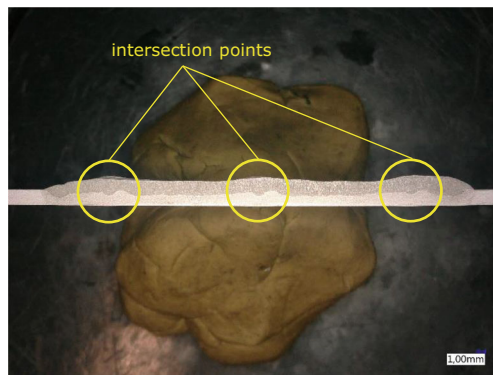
Macrosection of welding results of additive manufacturing of a grid on uncoated steel sheets
